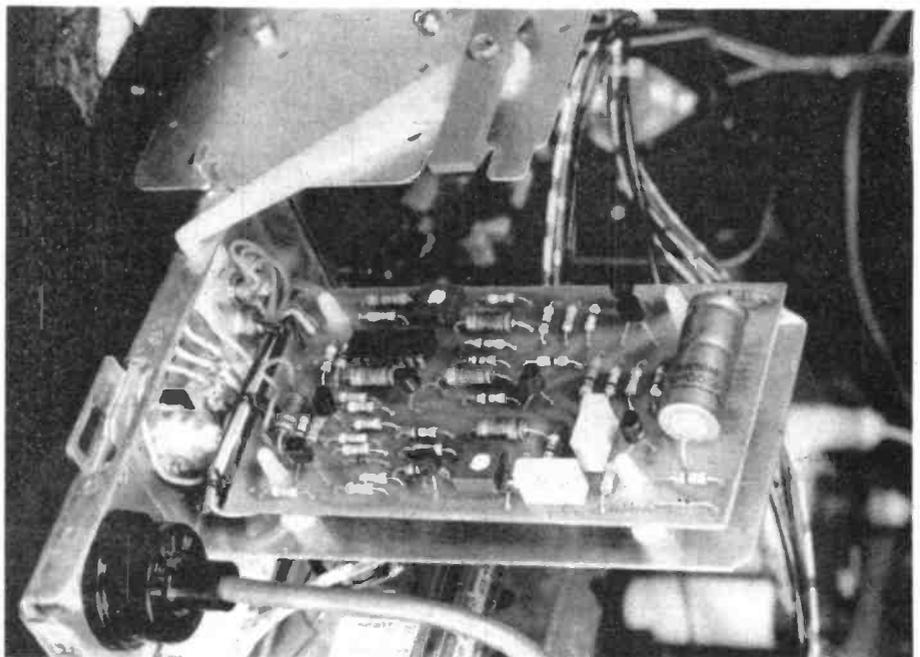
Internal view of the prototype board fitted into the TX10 chassis. This clearly shows the PCB pillars and heat layout — essential to prevent fouling any of the wiring inside the TV.
